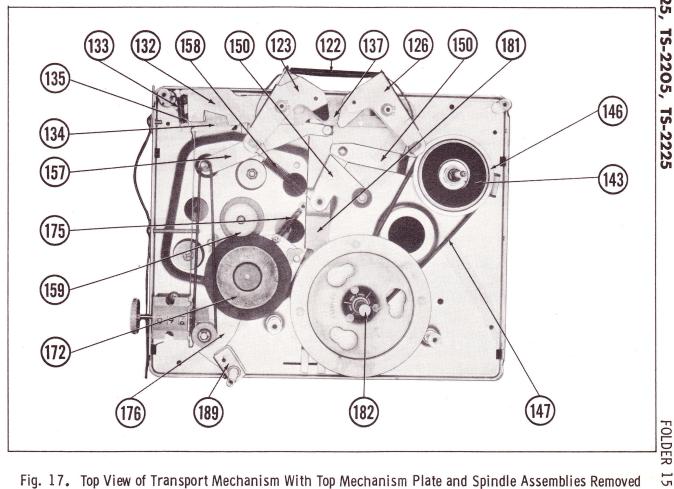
Top View of Transport Mechanism With Top Mechanism Plate and Spindle Assemblies Removed
